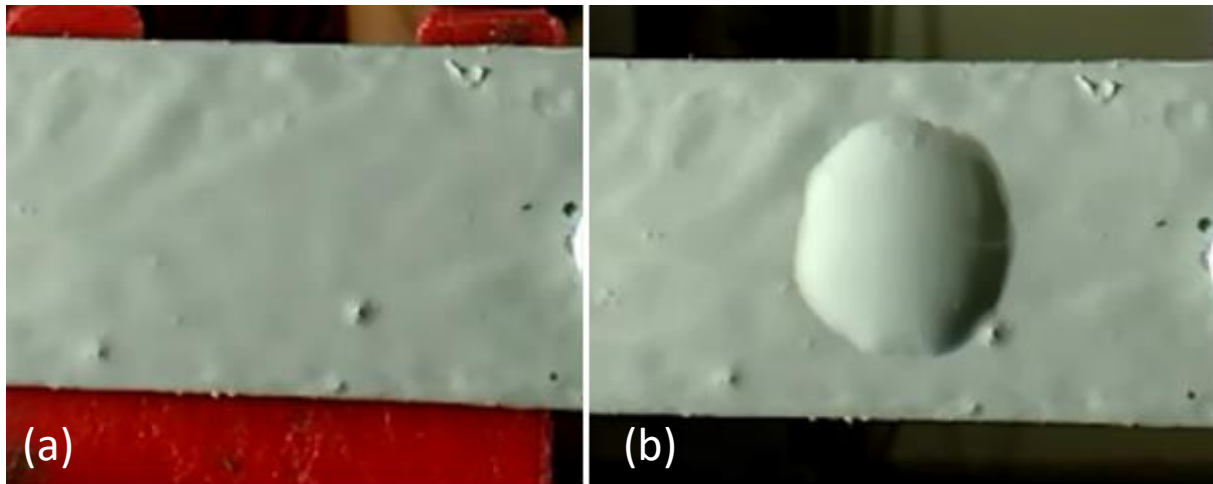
Effects of arc-generated heat on the coating paint on the backside of the 7,9 mm plate welded with a M16 stud. (a) before welding, (b) after welding
